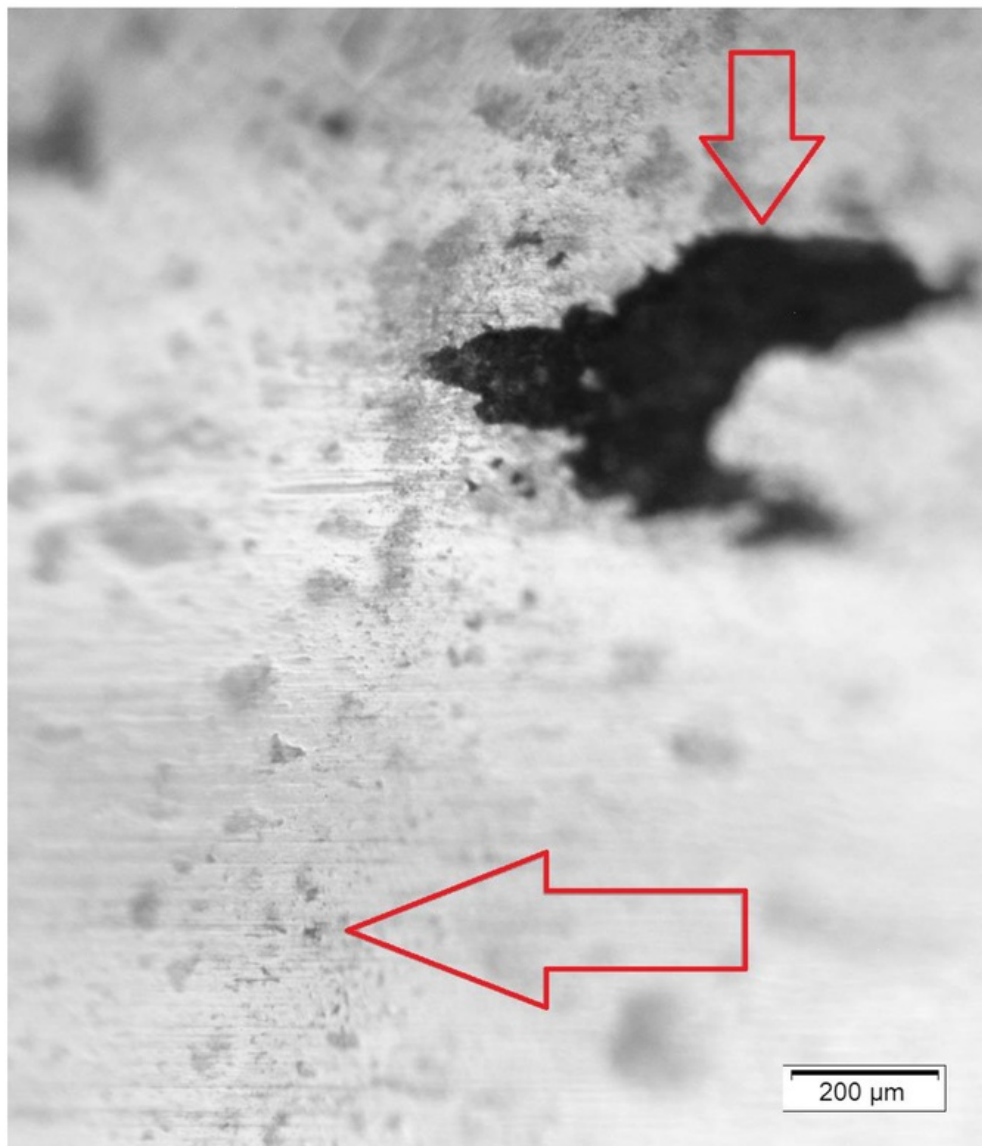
Bearing 4.2 inner race PSO spalling
